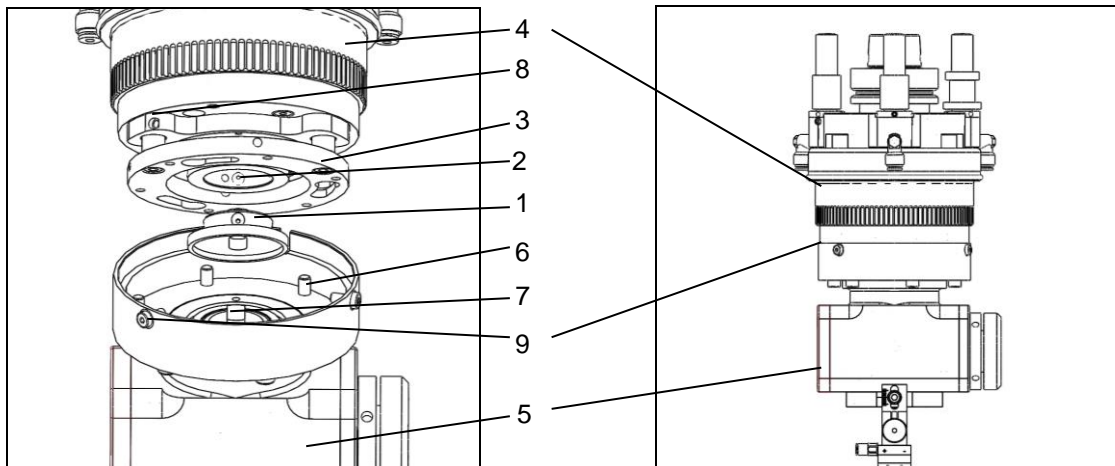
Assembly/Disassembly horizontal auxiliary head
